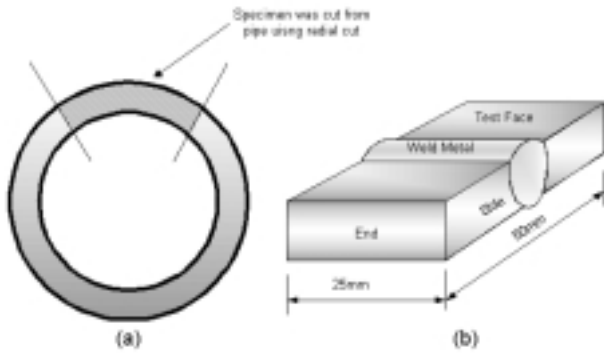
(a) samples cut from pipe using appropriate radial cuts. (b) test specimens machined with a test face size of 50(25 mm).
